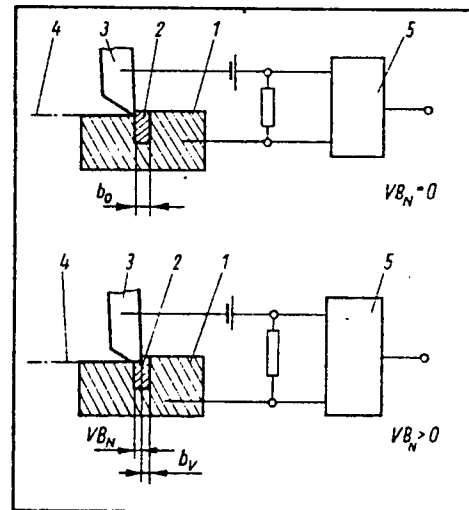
Principle for measuring cutting blade wear according to the electrical contact sensor for sharp and worn tool cutting blades.
